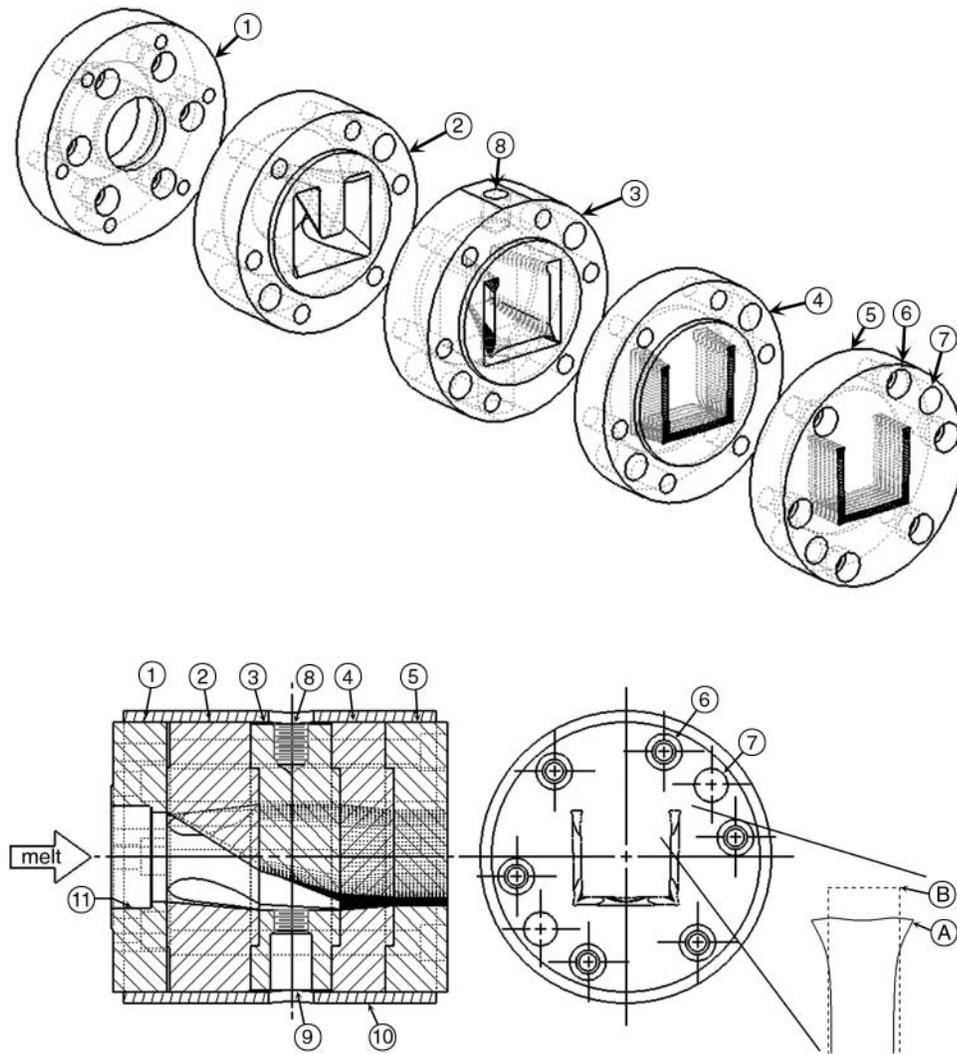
U-Profile stack die: exploded view (top); section view (lower left); and end view (lower right): (1) extruder mounting plate; (2) die adapter plate; (3) transition plate; (4) preland plate; (5) die land plate; (6) die bolt hole; (7) alignment dowel pin hole; (8) thermocouple well; (9) pressure transducer port; (10) heater band; (11) breaker plate recess. Detail (lower right): (A) die exit profile and (B) product profile.
